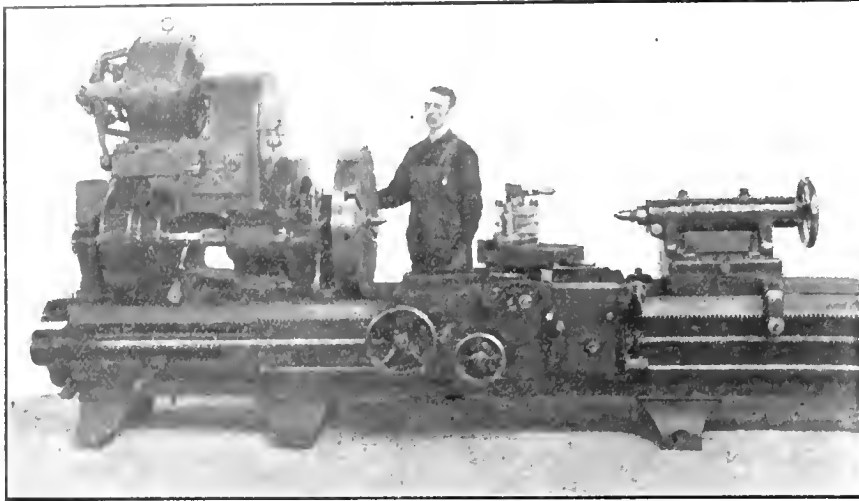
30-IN. ENGINE LATHE FOR GROOVING AND BAND TURNING.
